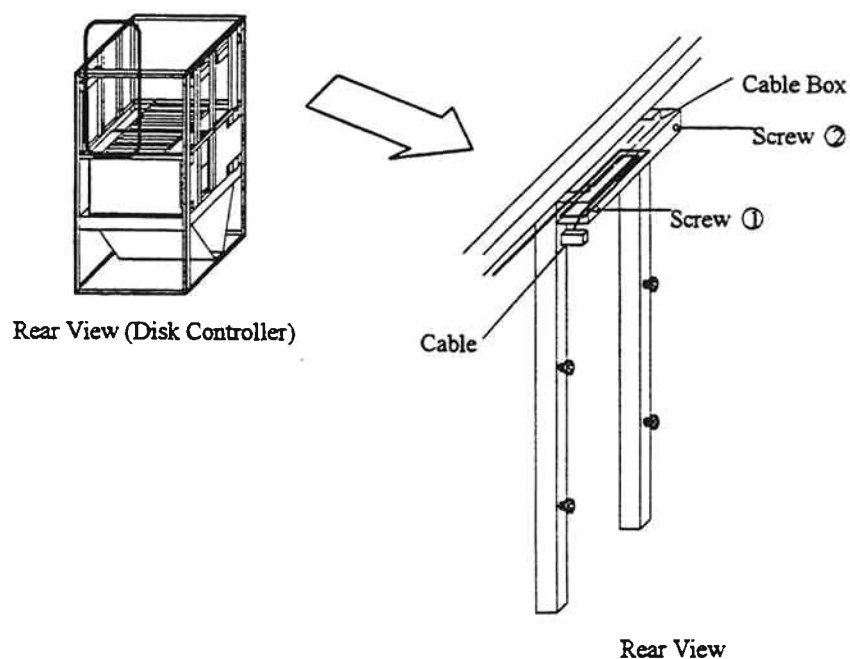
Attachment of the Cable Box
